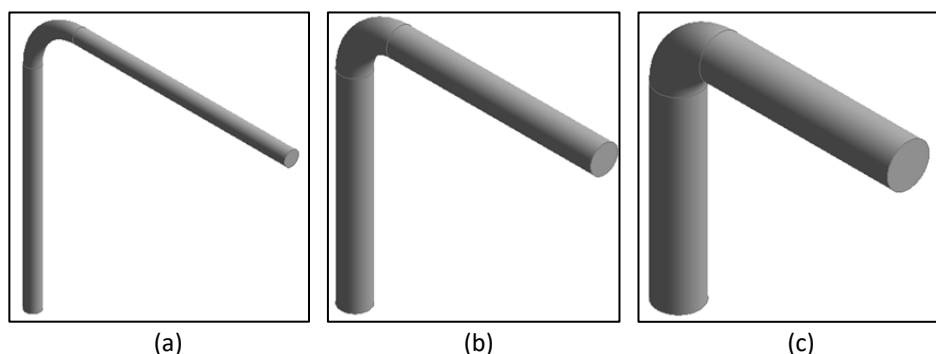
The geometry of 90-degree bend pipe (a) Diameter 1.5 cm (b) Diameter 3.0 cm (c) Diameter 5.0 cm
